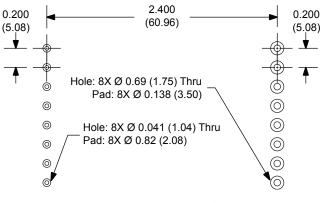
IMx-8P2 PCB Hole Pattern
